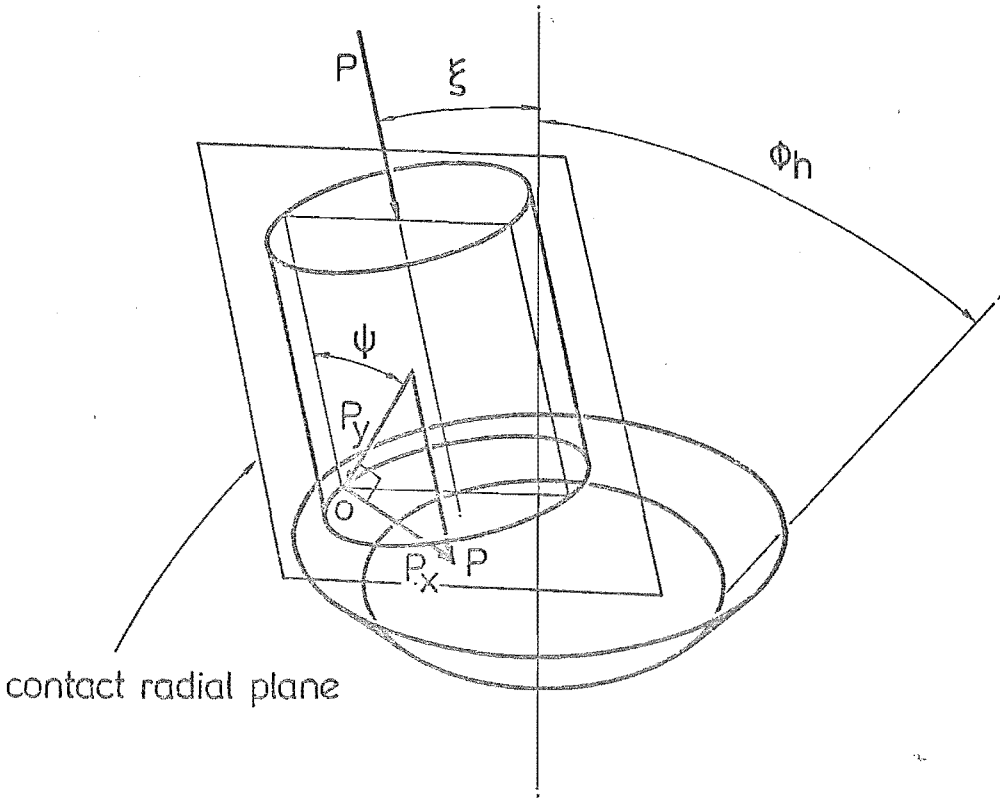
PEG EDGE /HOLE CHAMFER FACE
